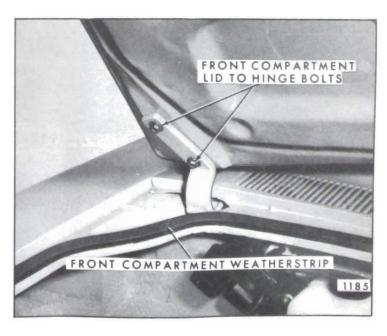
Front Compartment Weatherstrip And Front Compartment Lid Attaching Bolts
